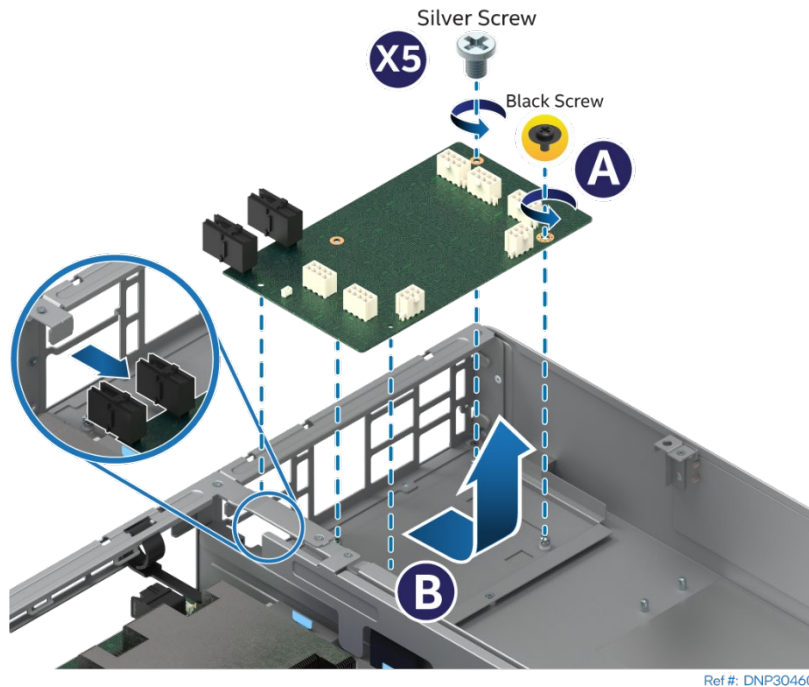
PCIe* Accelerator Module Power Connector Board Removal
